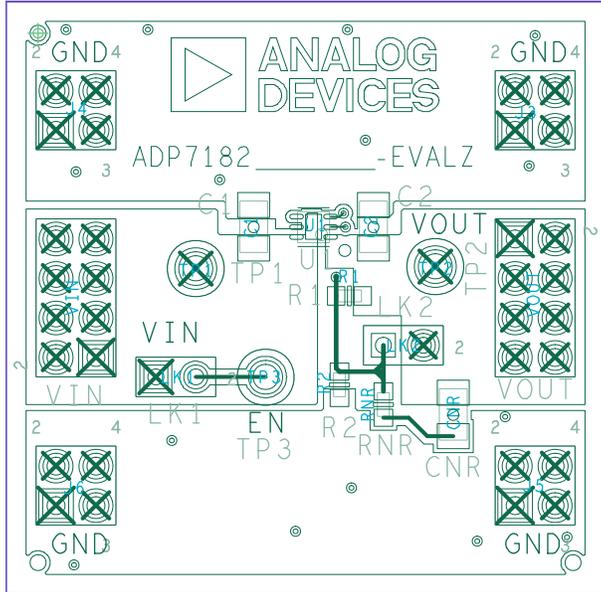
Example of the 6-Lead LFCSP PCB Layout
